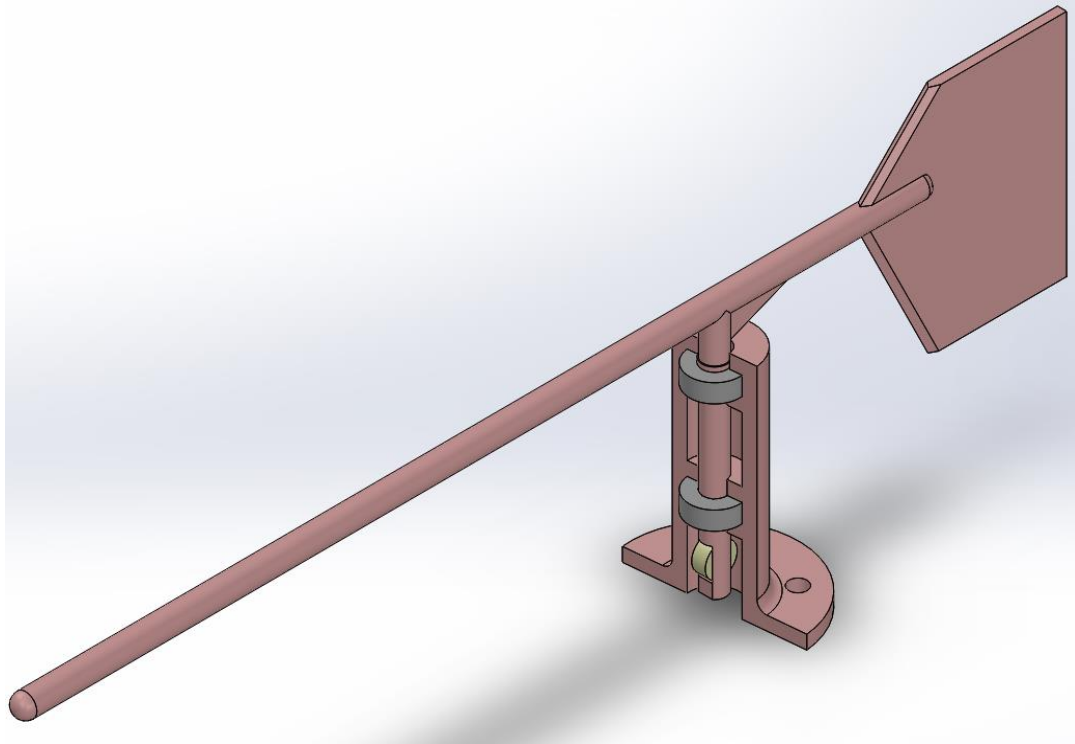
Wind Vane Assembly - Bearings shown in Grey, Magnet in Yellow, and 3D Printed Parts shown in Red
